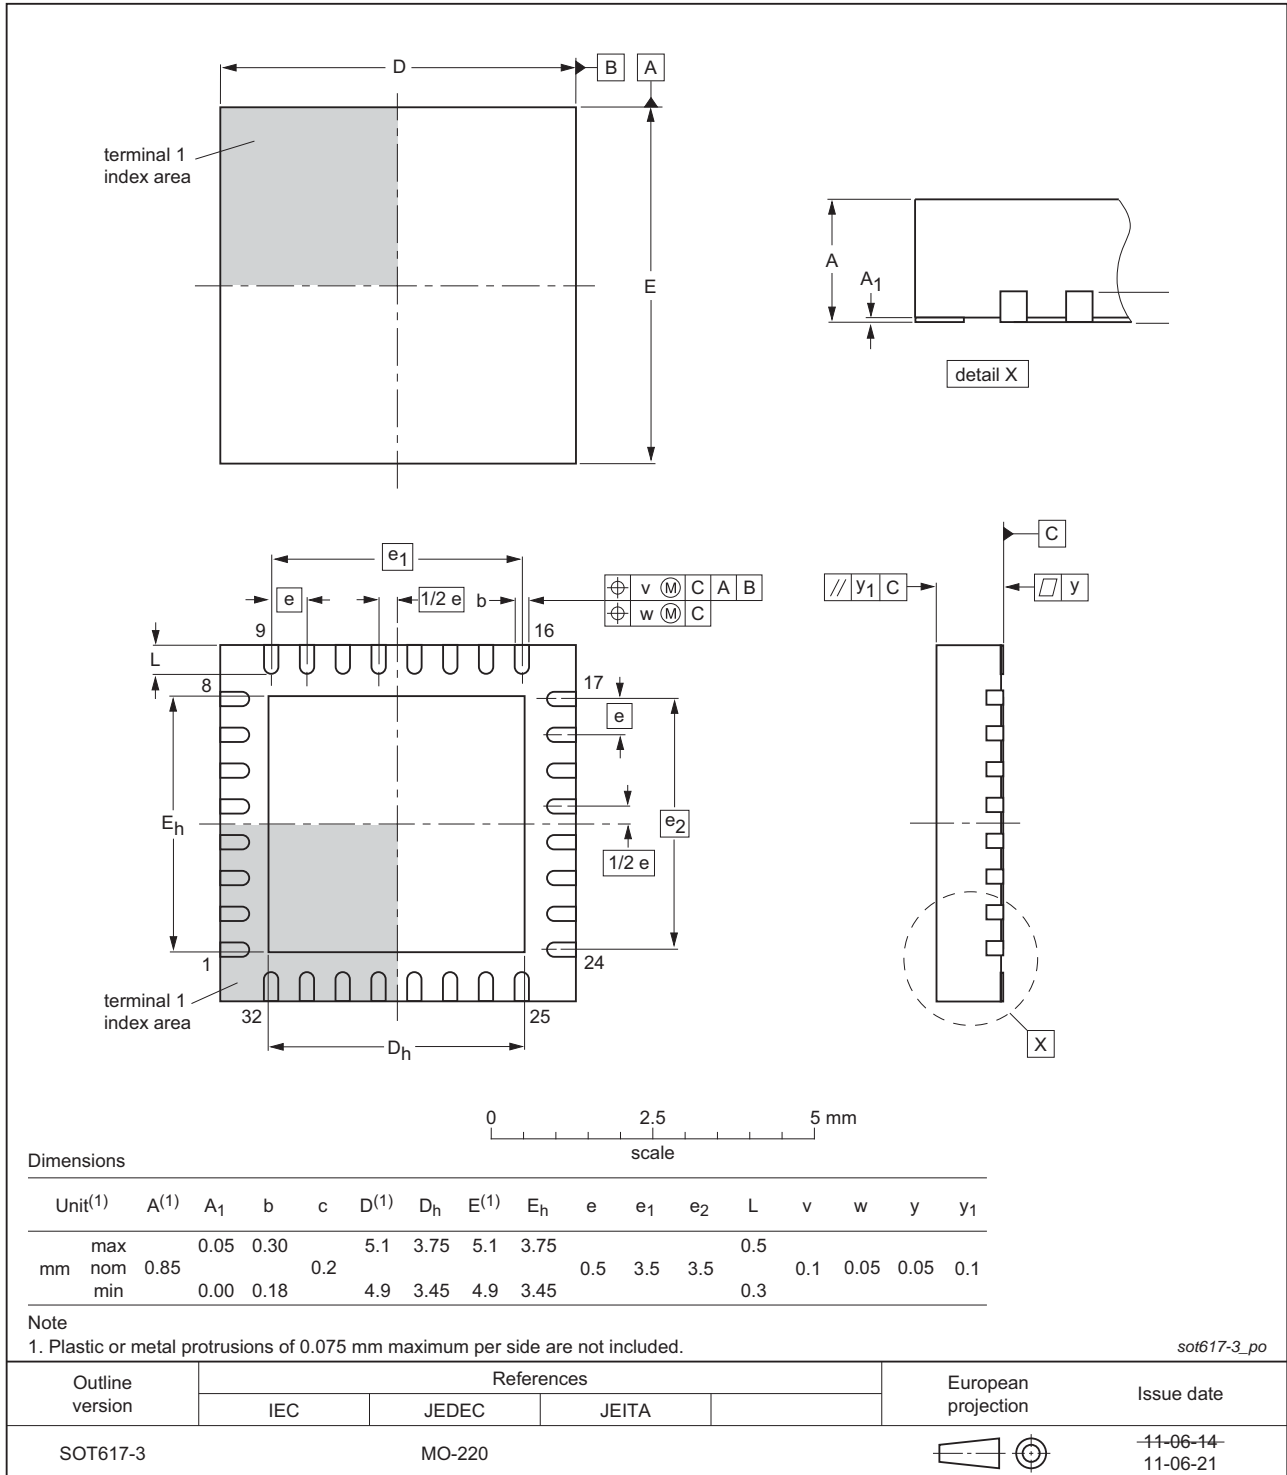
Package outline DFN5050-32 (SOT617-3/HVQFN32)
